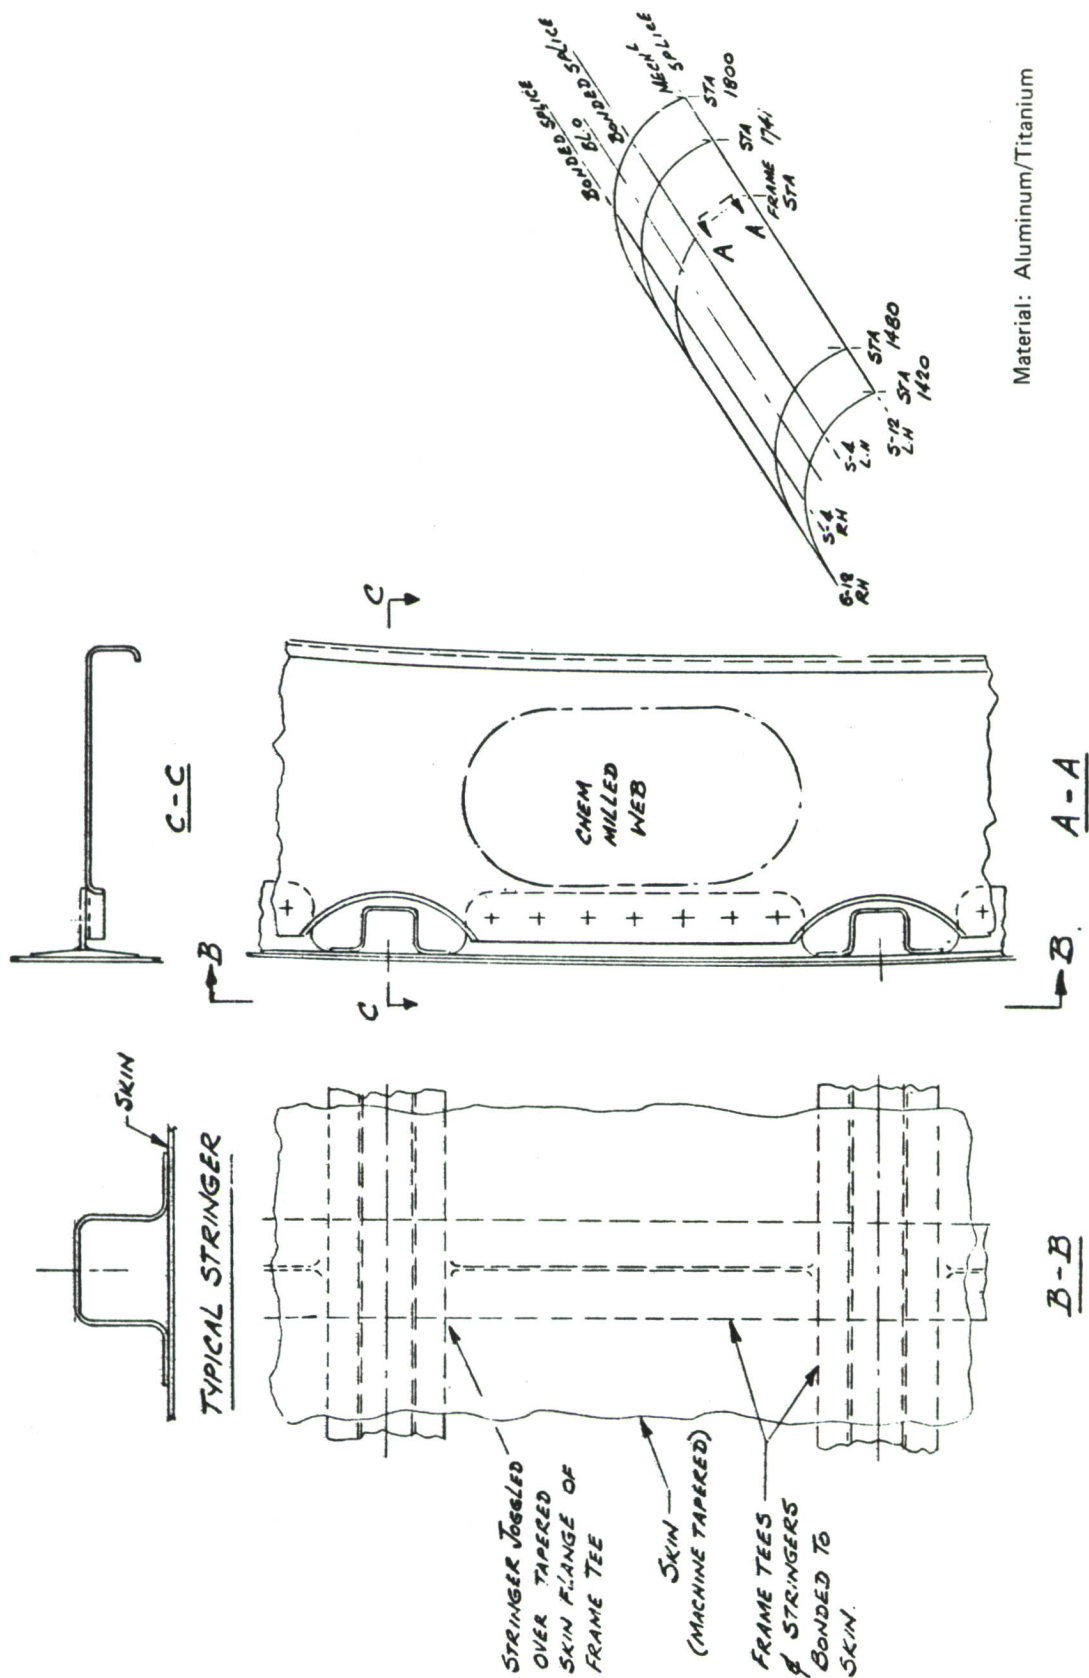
Shell-Skin/Stringer Bonded (Concept 1-1)
